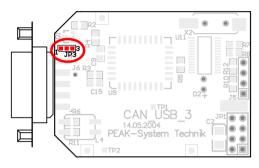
PCAN-USB board (IPEH-002021), solder field JP3
